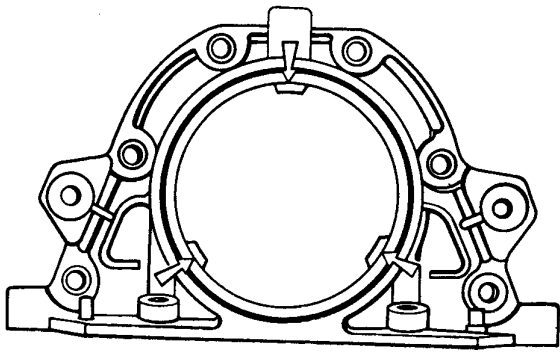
Crankshaft Rear Gland Holder. Arrows Indicate Lugs for Aligning Holder with Crankshaft Flange
